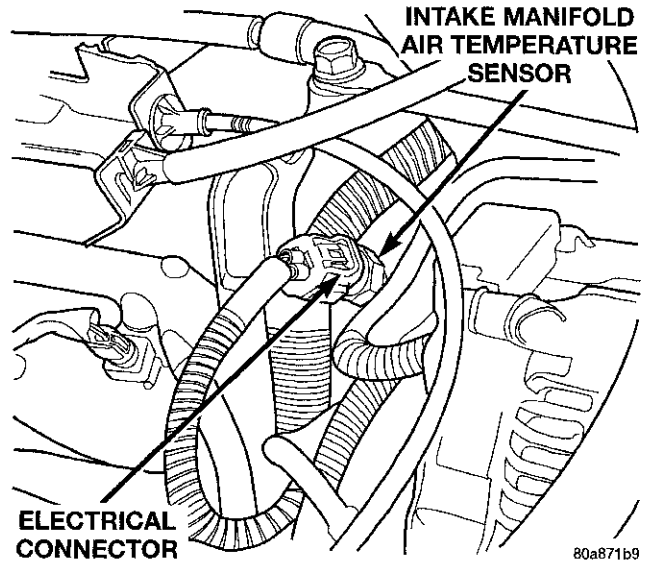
Air Temperature Sensor—3.9L/5.2L/5.9L Engines—Typical (V-8 Shown)
